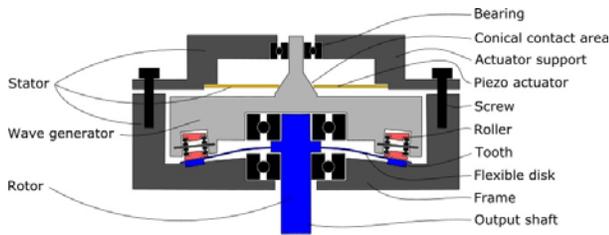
Cross section of the new piezo motor revealing the three main building blocks
